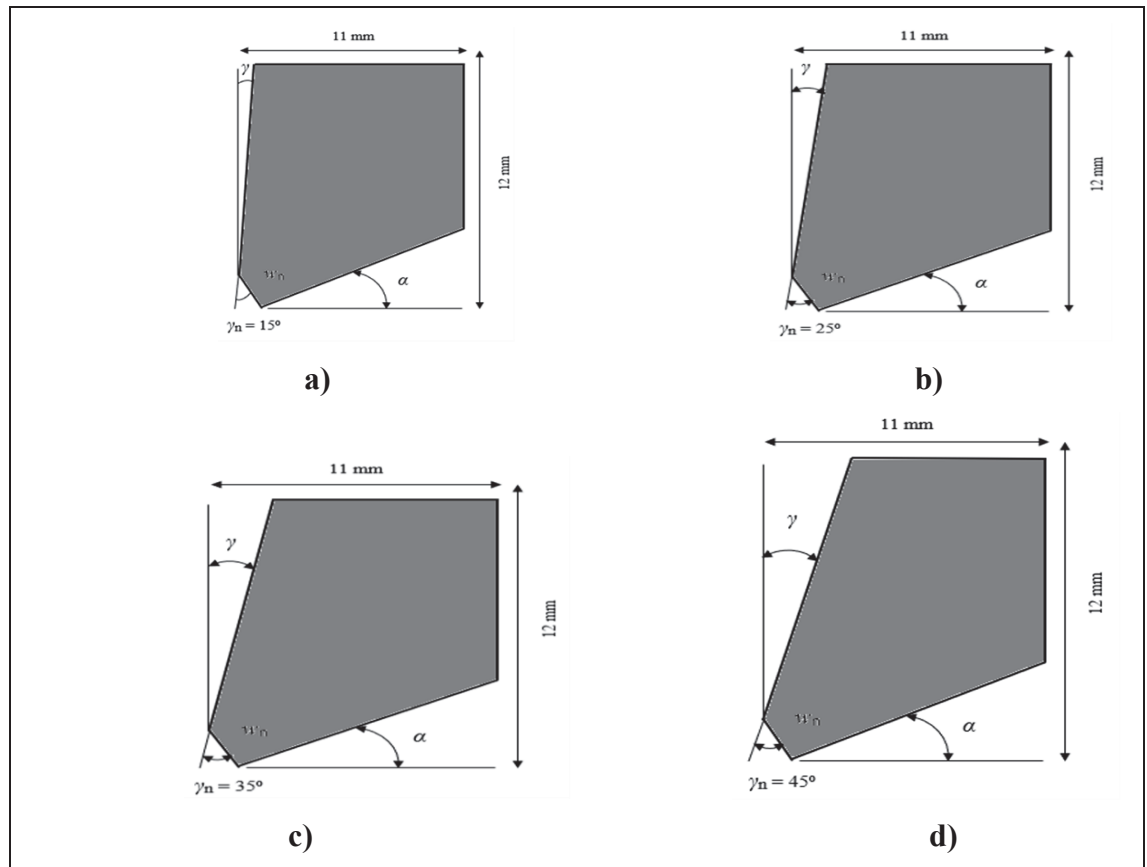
Chamfer cutting tool geometries with different chamfer angles γ_n :
